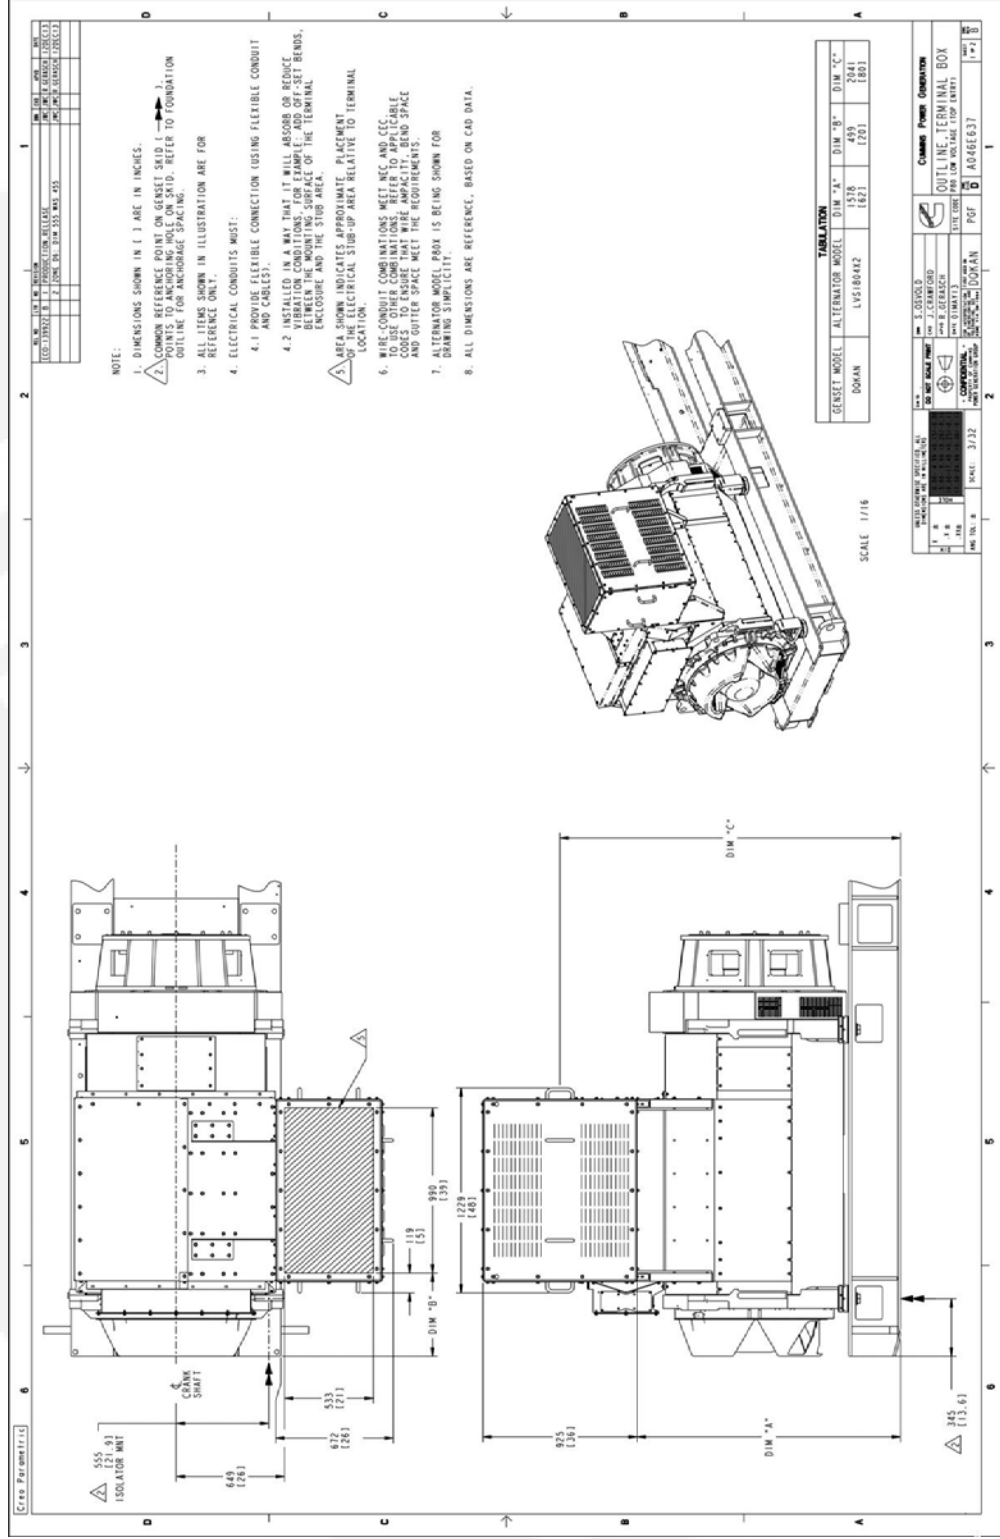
TERMINAL BOX OUTLINE, INSTALLATION DIMENSIONS (SHEET 1 OF 2)
